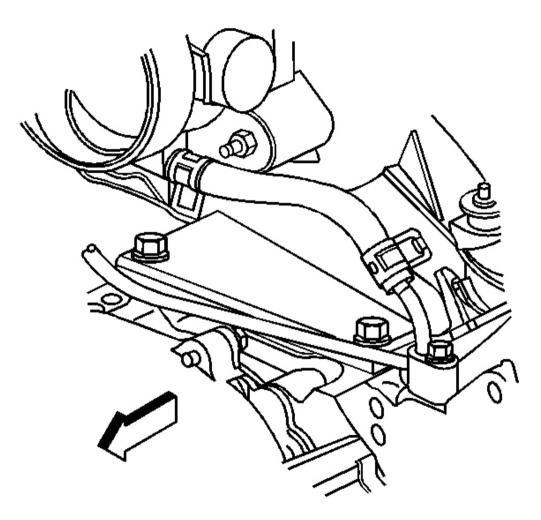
Coolant Air Bleed Hose Courtesy of GENERAL MOTORS CORP.
